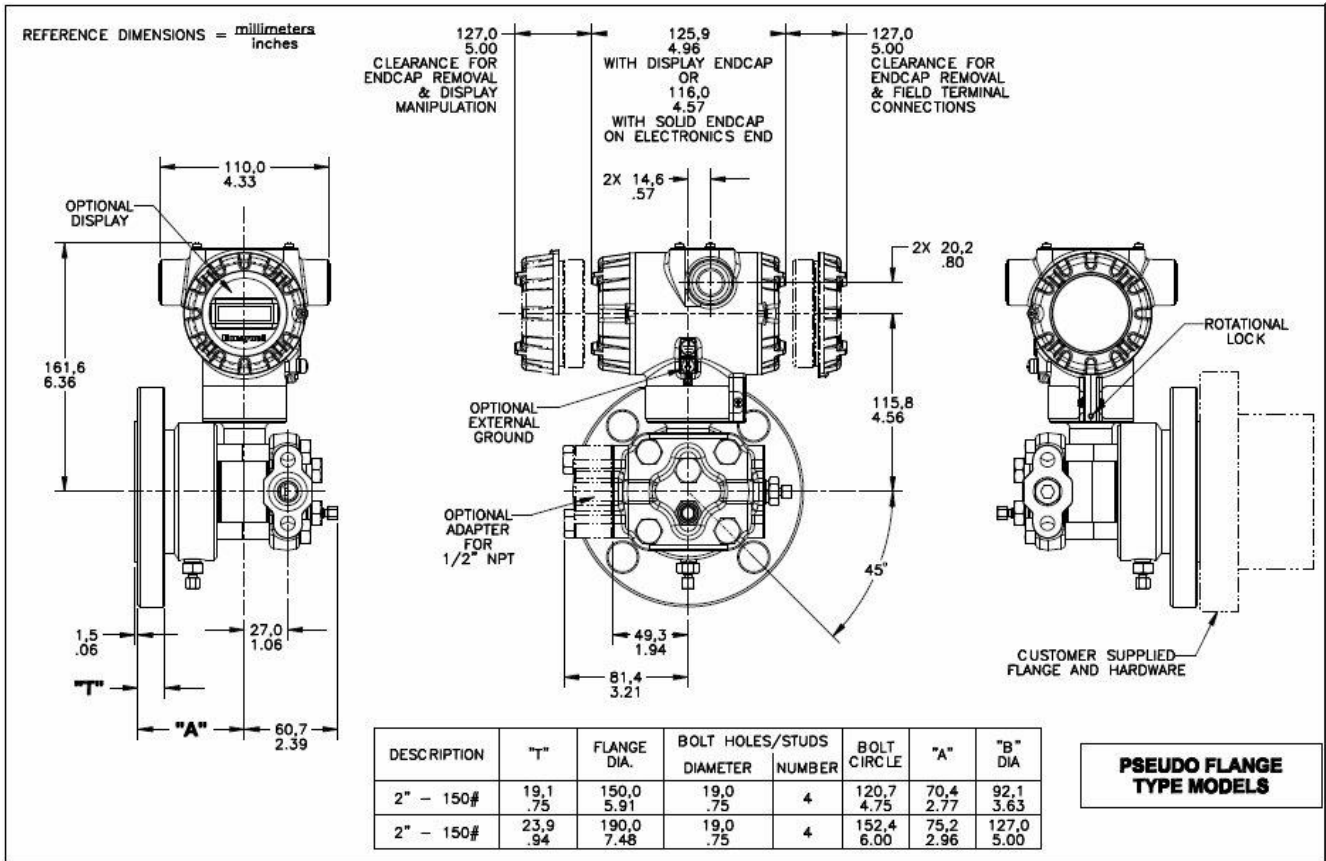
Typical mounting dimensions for pseudo flange type models STF72F, STF73F, and STF74F.
